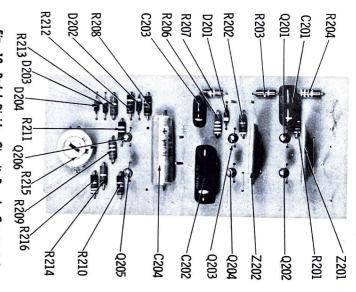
Pedal Divider Circuit Board—Component Identification.
